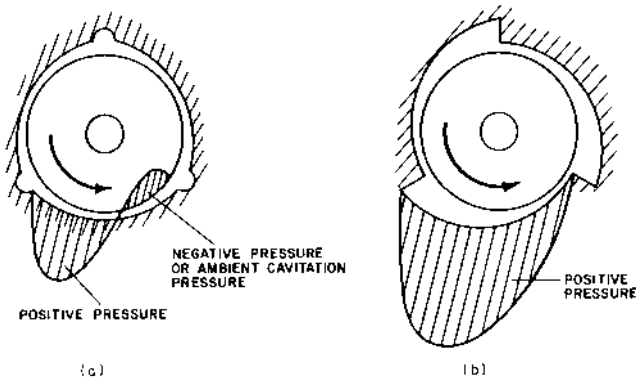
(a) symmetric lobe bearing and (b) canted lobe bearing.
